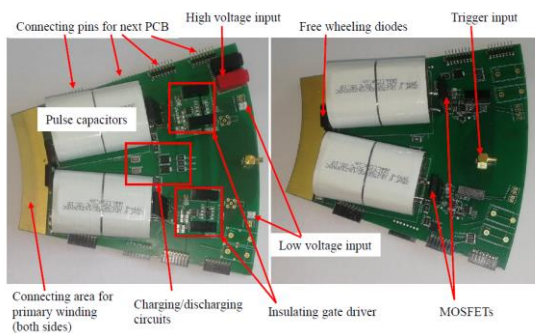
The PCB with two parallel branches of the primary circuit with the insulating gate driver on separate PCBs (left) and on the main PCB (right) (CERN-THESIS-2019-363)
